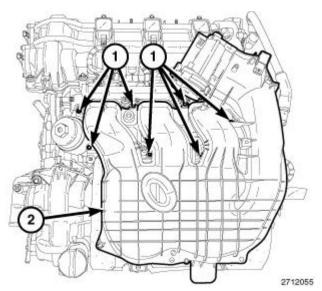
Upper Intake Manifold & Bolts Courtesy of CHRYSLER GROUP, LLC
